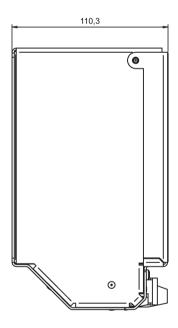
6EP4134-0GB00-0AY0 dimensioned drawing
